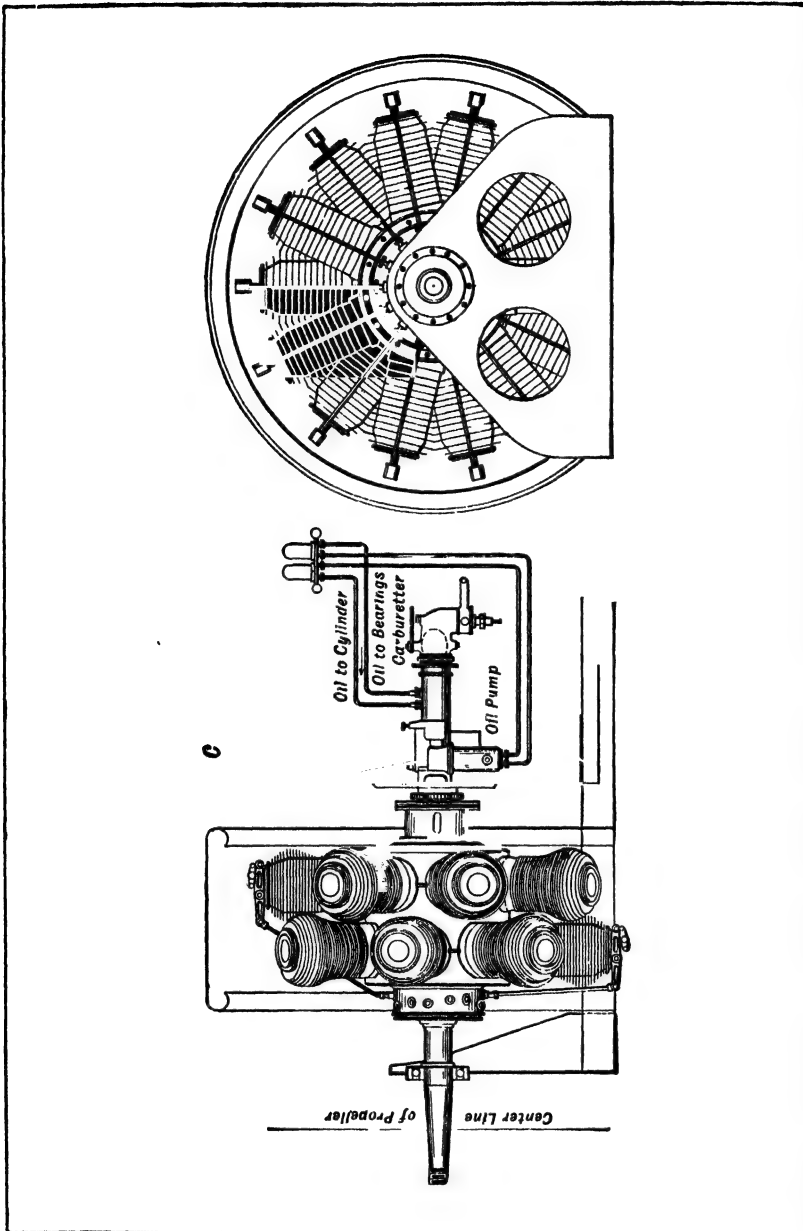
Installation Diagram Showing Method of Mounting an Early Fourteen-Cylinder, 100 Horsepower Gnome Aviation Engine.
